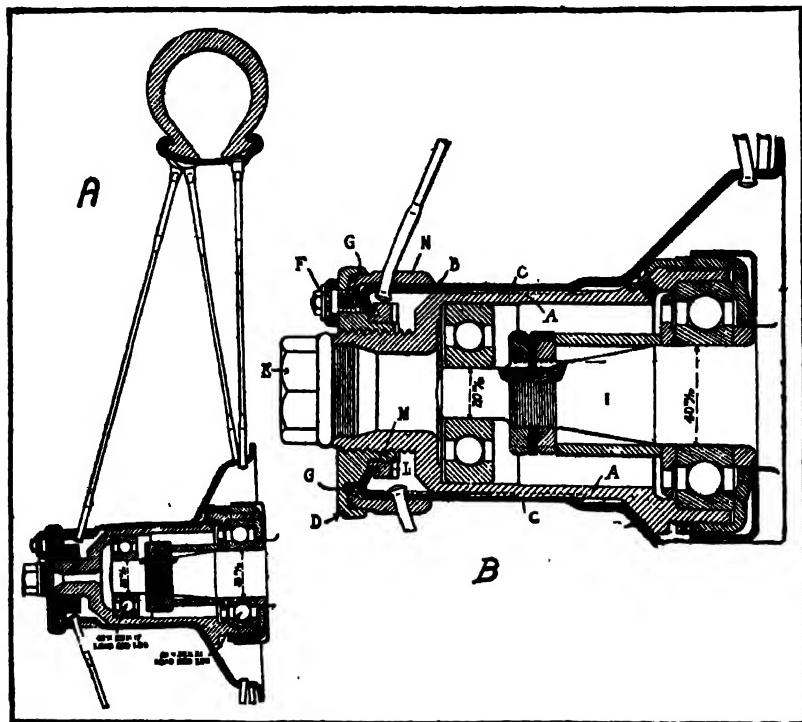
Sectional View, Showing Construction of Rudge-Whitworth Wire Wheel.
